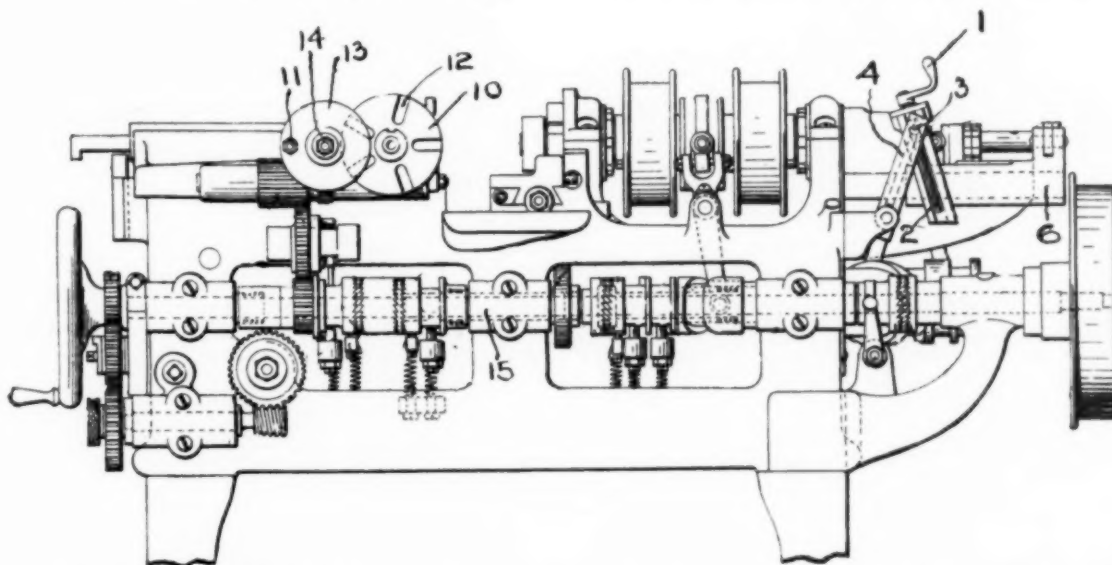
AUTOMATIC SCREW MACHINE SHOWING FEEDING AND INDEXING DEVICES, ALSO USE OF CONTROLLING SHAFT.
